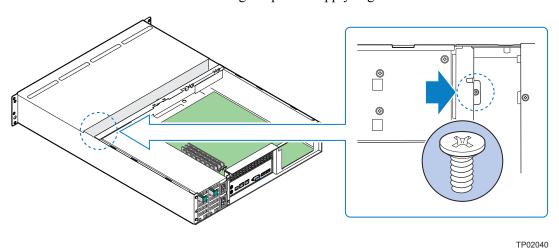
Removing Screw Securing Power Supply Cage to Chassis
